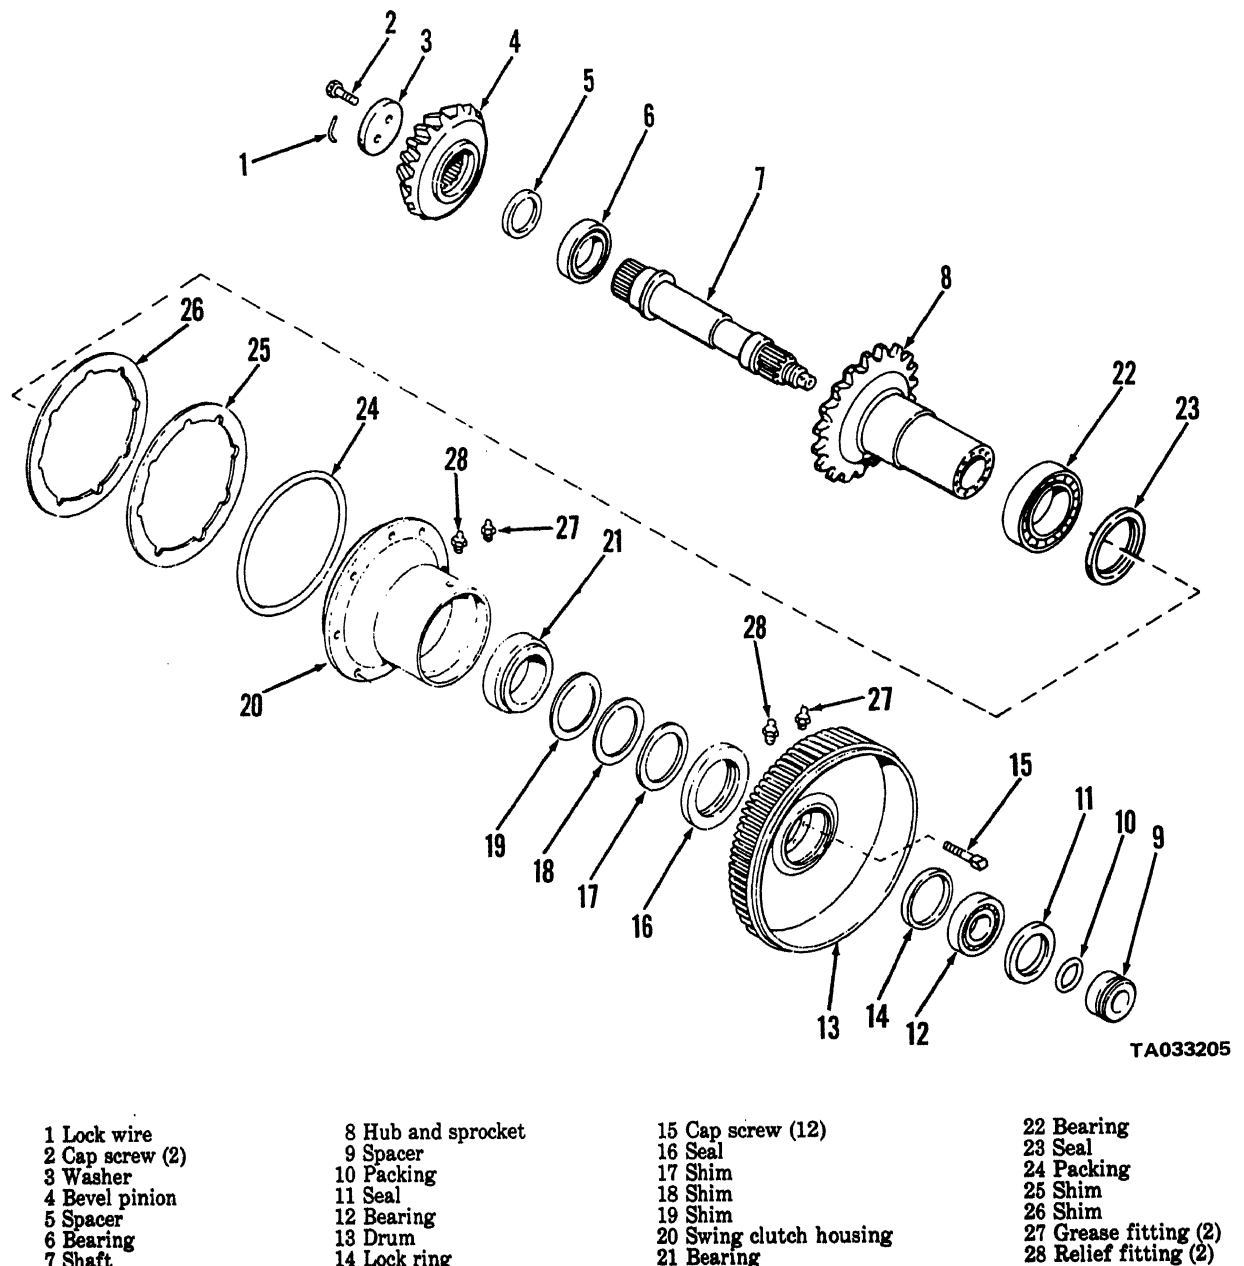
Horizontal swing shaft assembly—exploded view.
